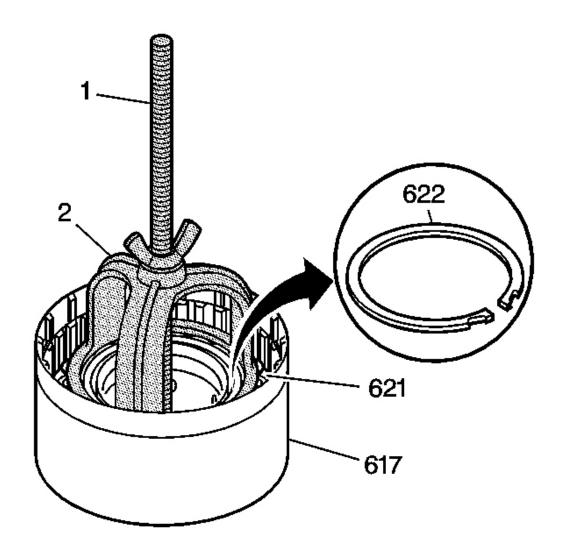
Using J 23327 & J 38734 To Compress The Second Clutch Piston Spring Courtesy of GENERAL MOTORS CORP.
